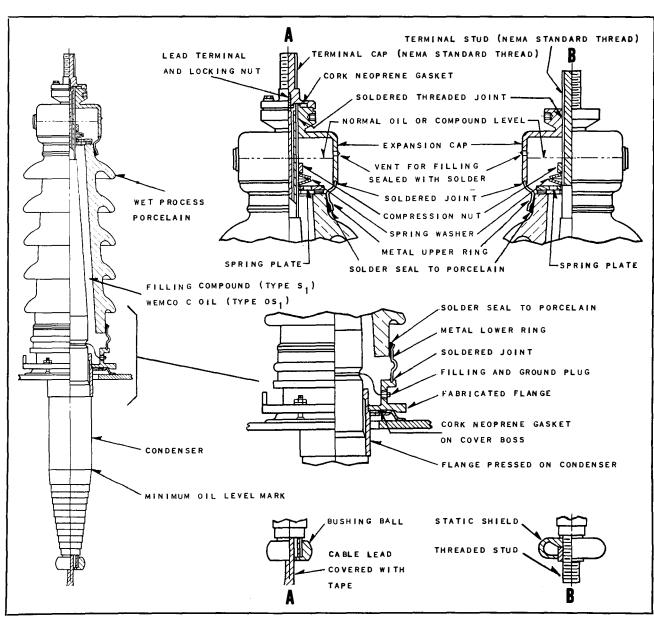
Sectional View—(A) Bushing with Draw-Through Cable;
